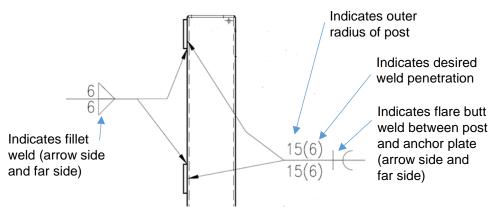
Bridge Traffic Barrier Post to Anchor Plate
